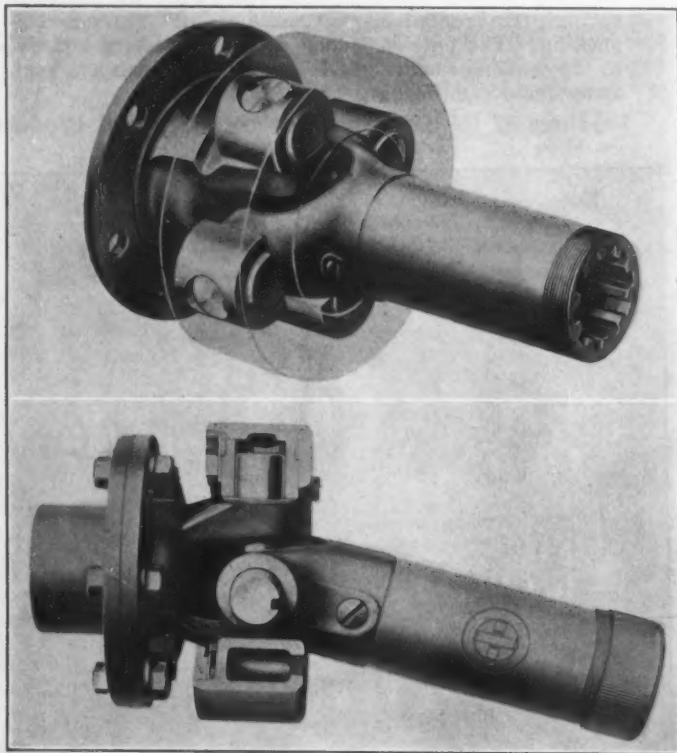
SPICER TYPE-O OIL-LUBRICATED JOINT
